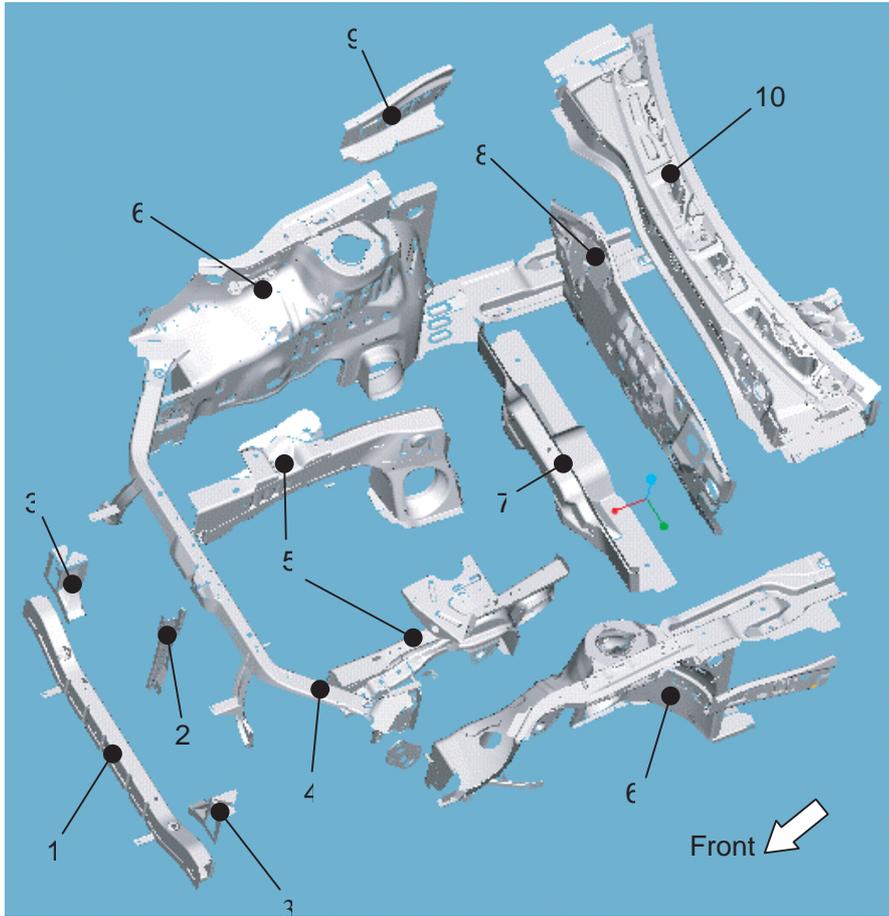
Dismantle diagram of front sheet metal and cowl parts
